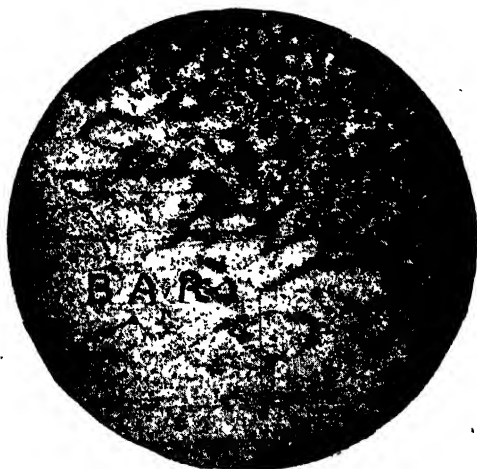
ACETYLENE WELD IN ALUMINIUM
